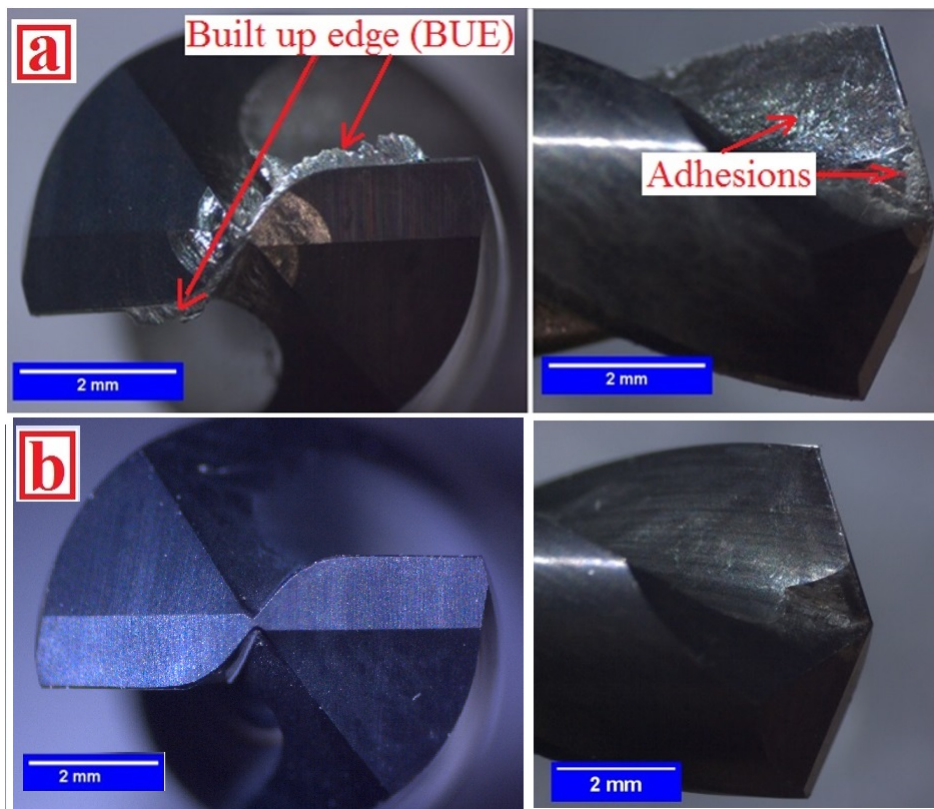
Built up edge and adhesion in cutting tools (a) Al2024-T3 (b) GLARE 2B
